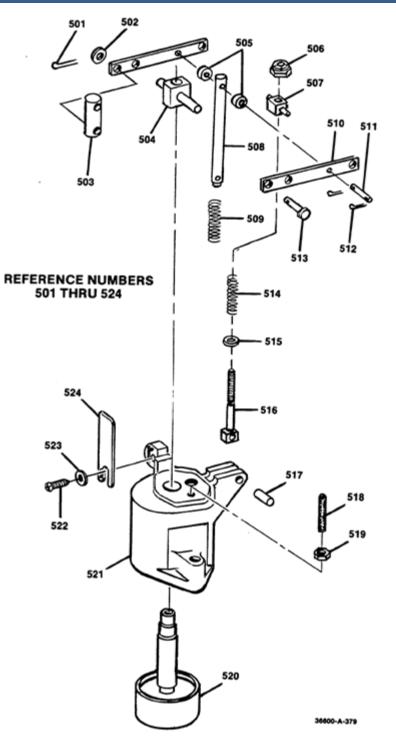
Illustrated Parts of Speed Setting Cylinder
